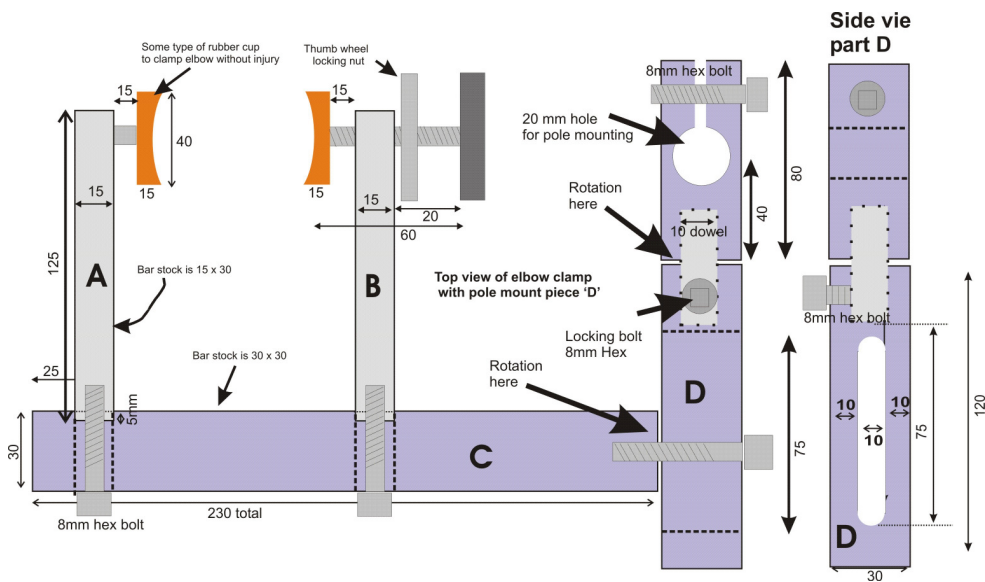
Views of the elbow clamp: Parts A, B, C, and D -
